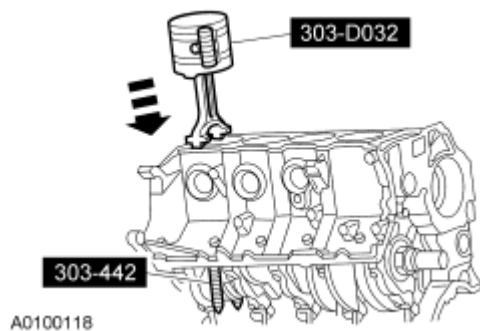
Installing No. 1 & No. 6 Piston & Connecting Rod Assemblies Using Special Tools (303-442) & (303-D032)
